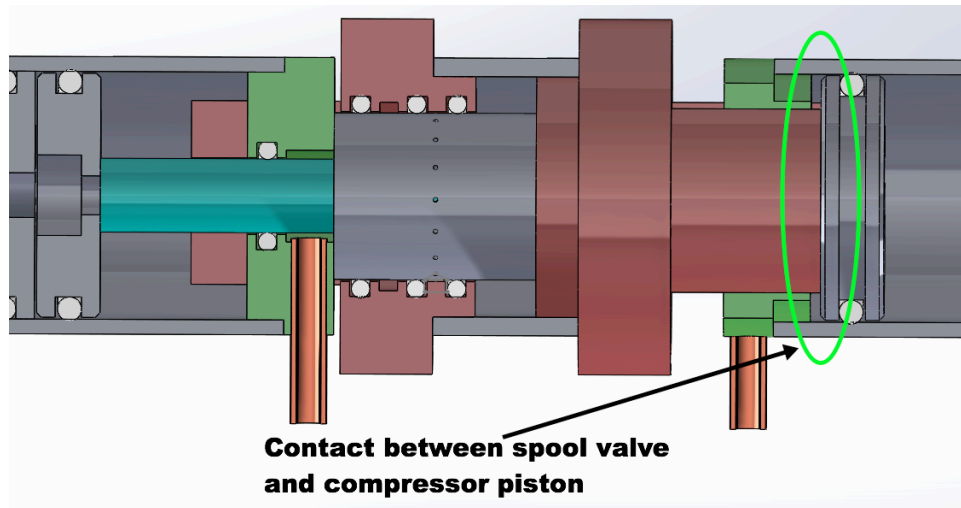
Detail of the contact between spool valve and compressor piston. The picture show a fully actuated spool valve.
